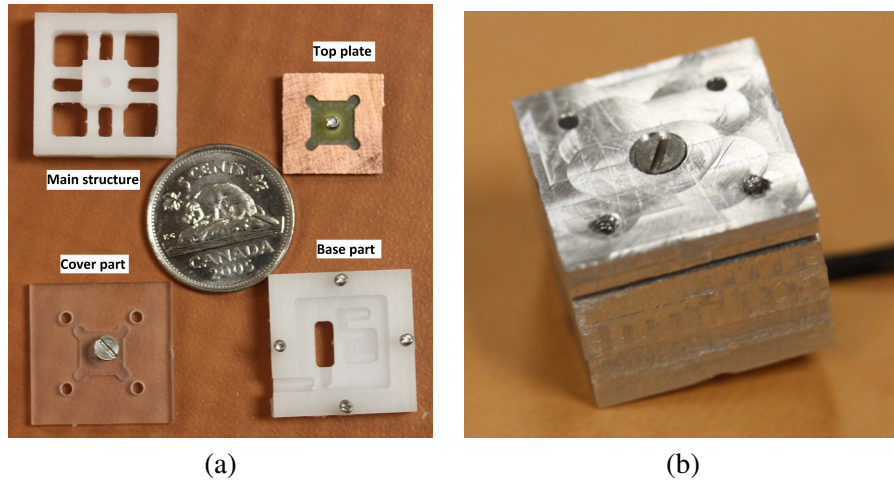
3-axis force sensor prototypes: (a) Delrin® assembling parts (b), assembled aluminum version.
